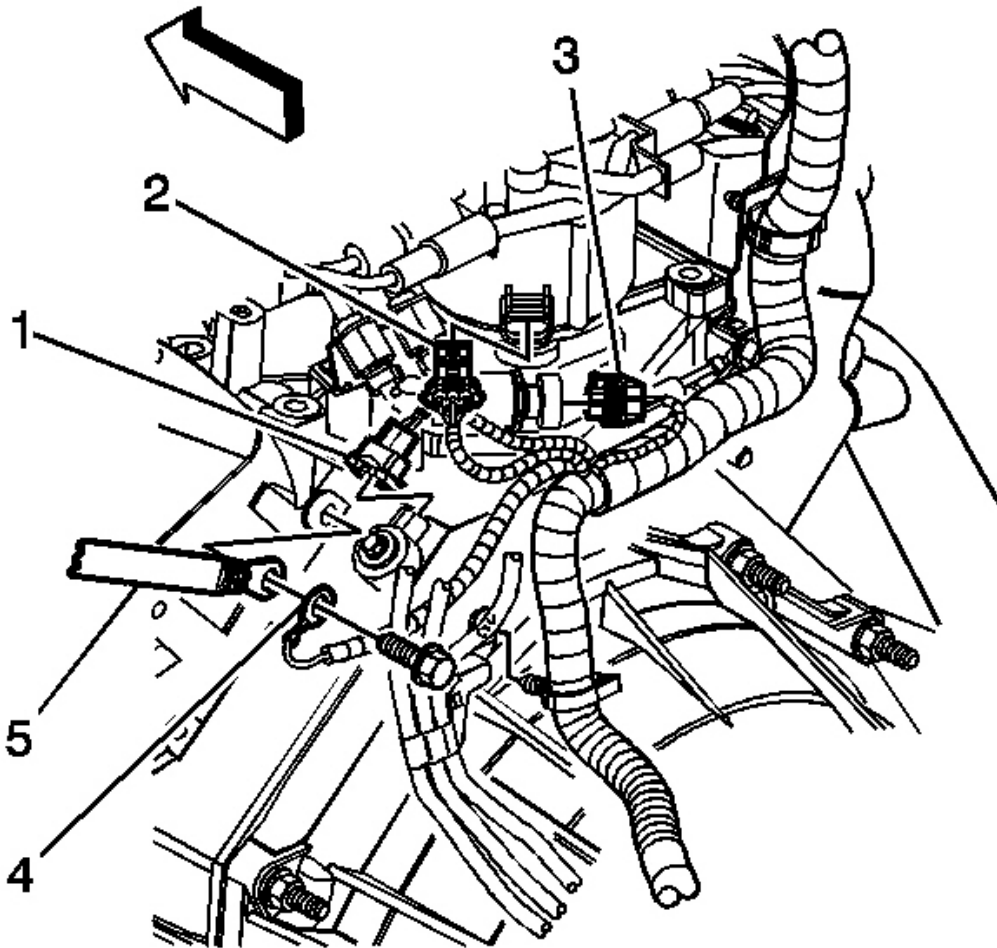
View Of Ground Strap And CMP & Fuel Pump/Oil Pressure Sensor Connectors
